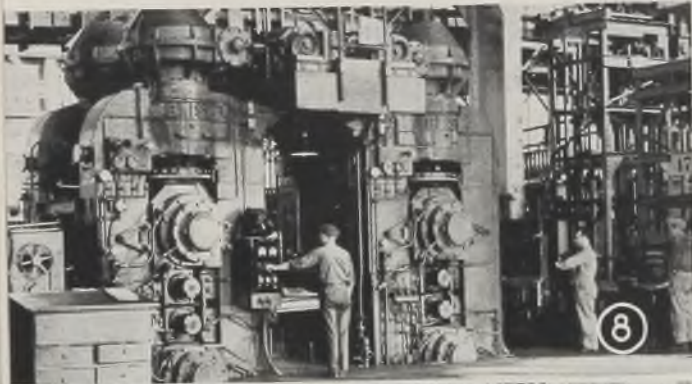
This 2-stand, 4-high tandem mill cold reduces the semifinished material in two passes. After the first pass, the coils are returned by conveyor to the entrance side. The elevator at the right conveys the coils to a spiral conveyor which will take them by gravity to the annealing furnaces
